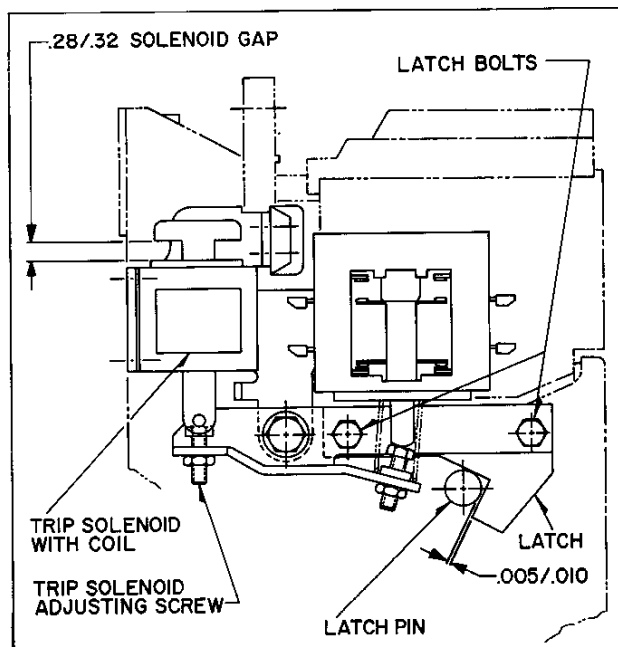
Adjustment of Latch and Trip Solenoid - Contactor Closed
